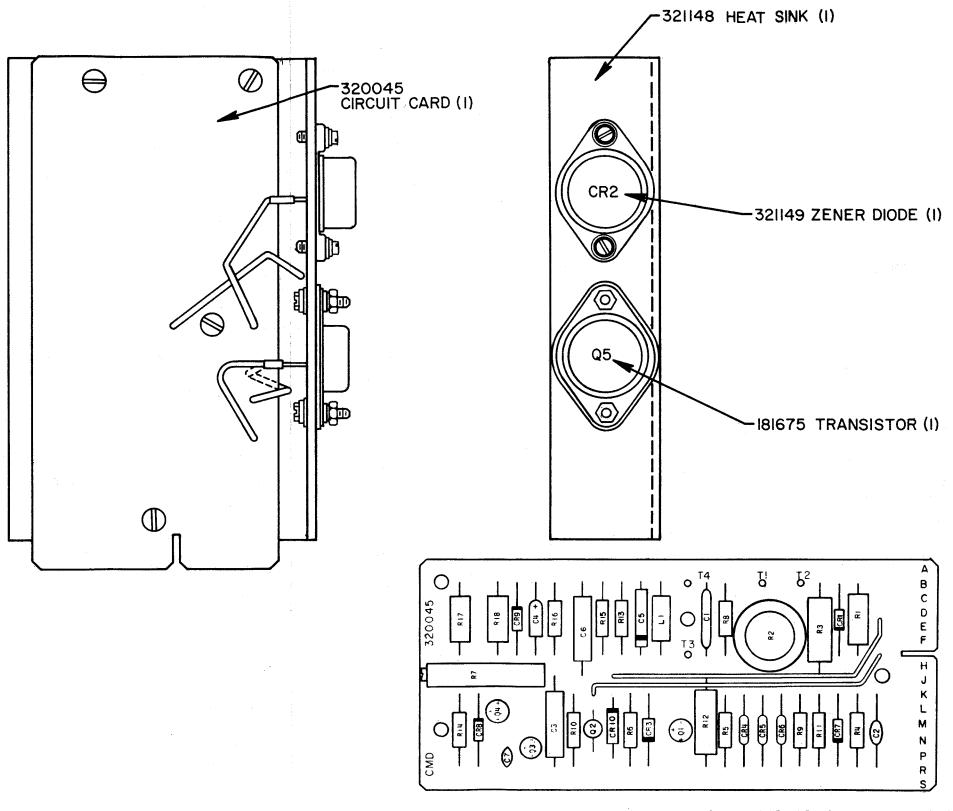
Clutch Magnet Driver 321991 (Sheet 1 of 2)
